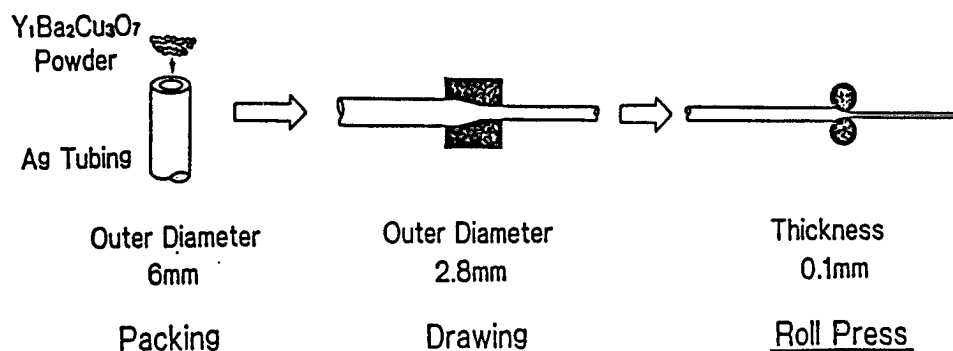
Process of manufacturing tape wire by the drawing-rolling method
